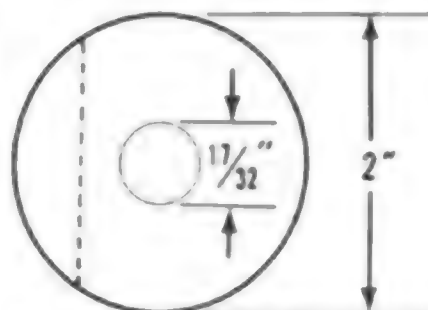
Dimension for making washer to determine the shims needed for planet gear preload. Refer to text.
